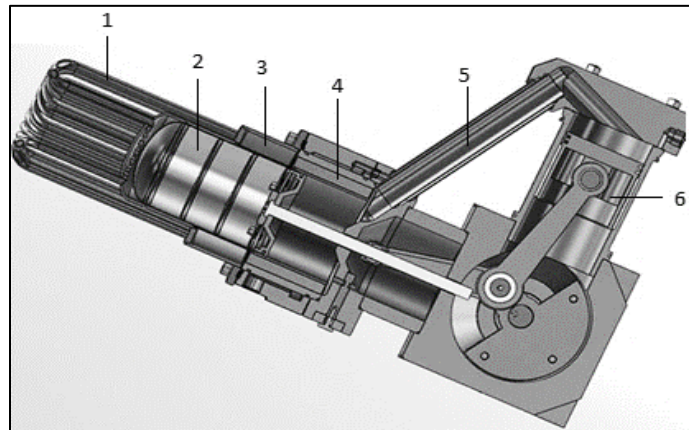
Engine components: 1-Heater, 2-Displacer piston, 3-Regenerator, 4-Cooler, 5-Connecting pipe, 6-Power piston.
